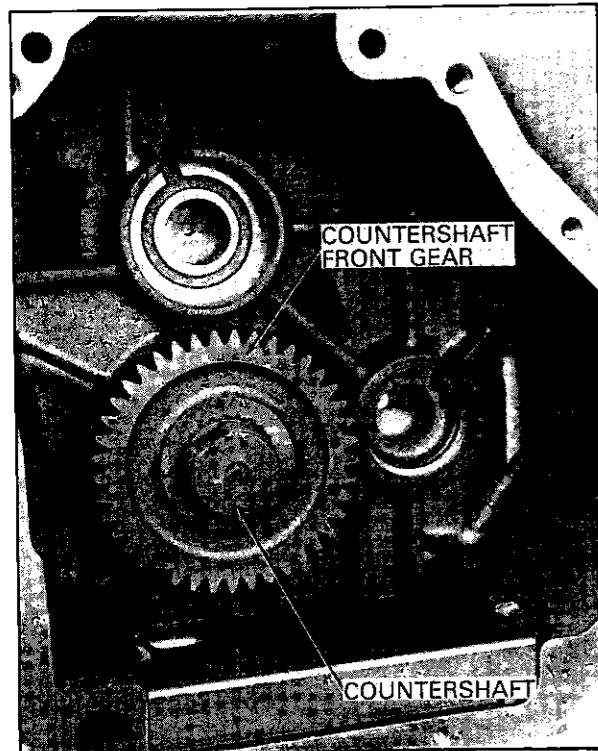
COUNTERSHAFT FRONT GEAR INSTALLATION
